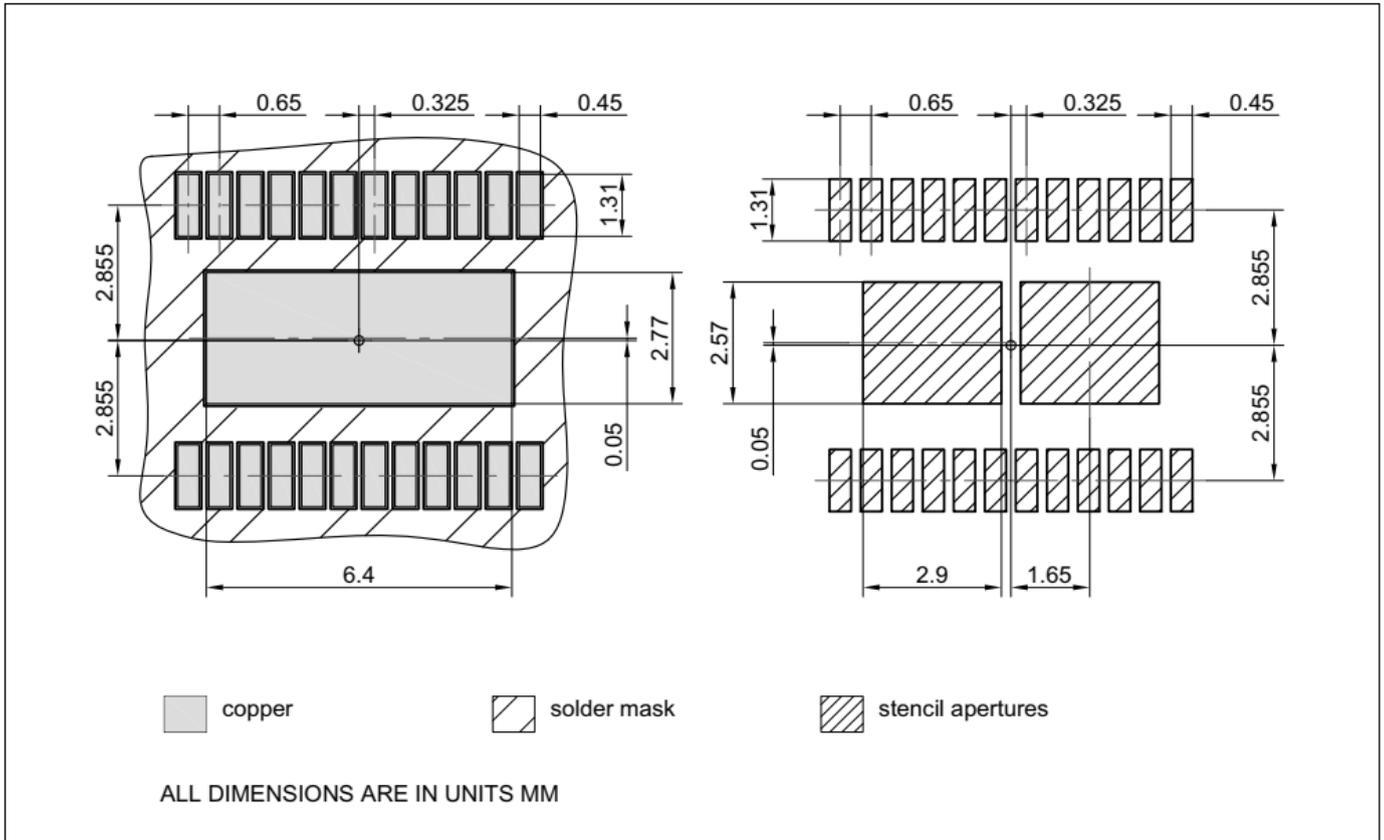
PG-TSDSO-24 (Thin (Slim) Dual Small Outline 24 pins) Package pads and stencil
